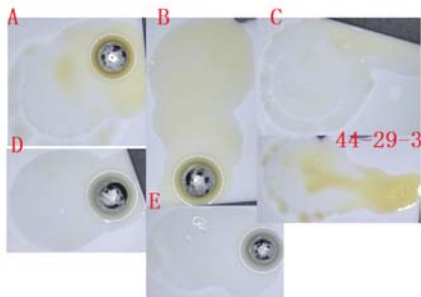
Picture of solder balls around the paste deposits on ceramic coupon
